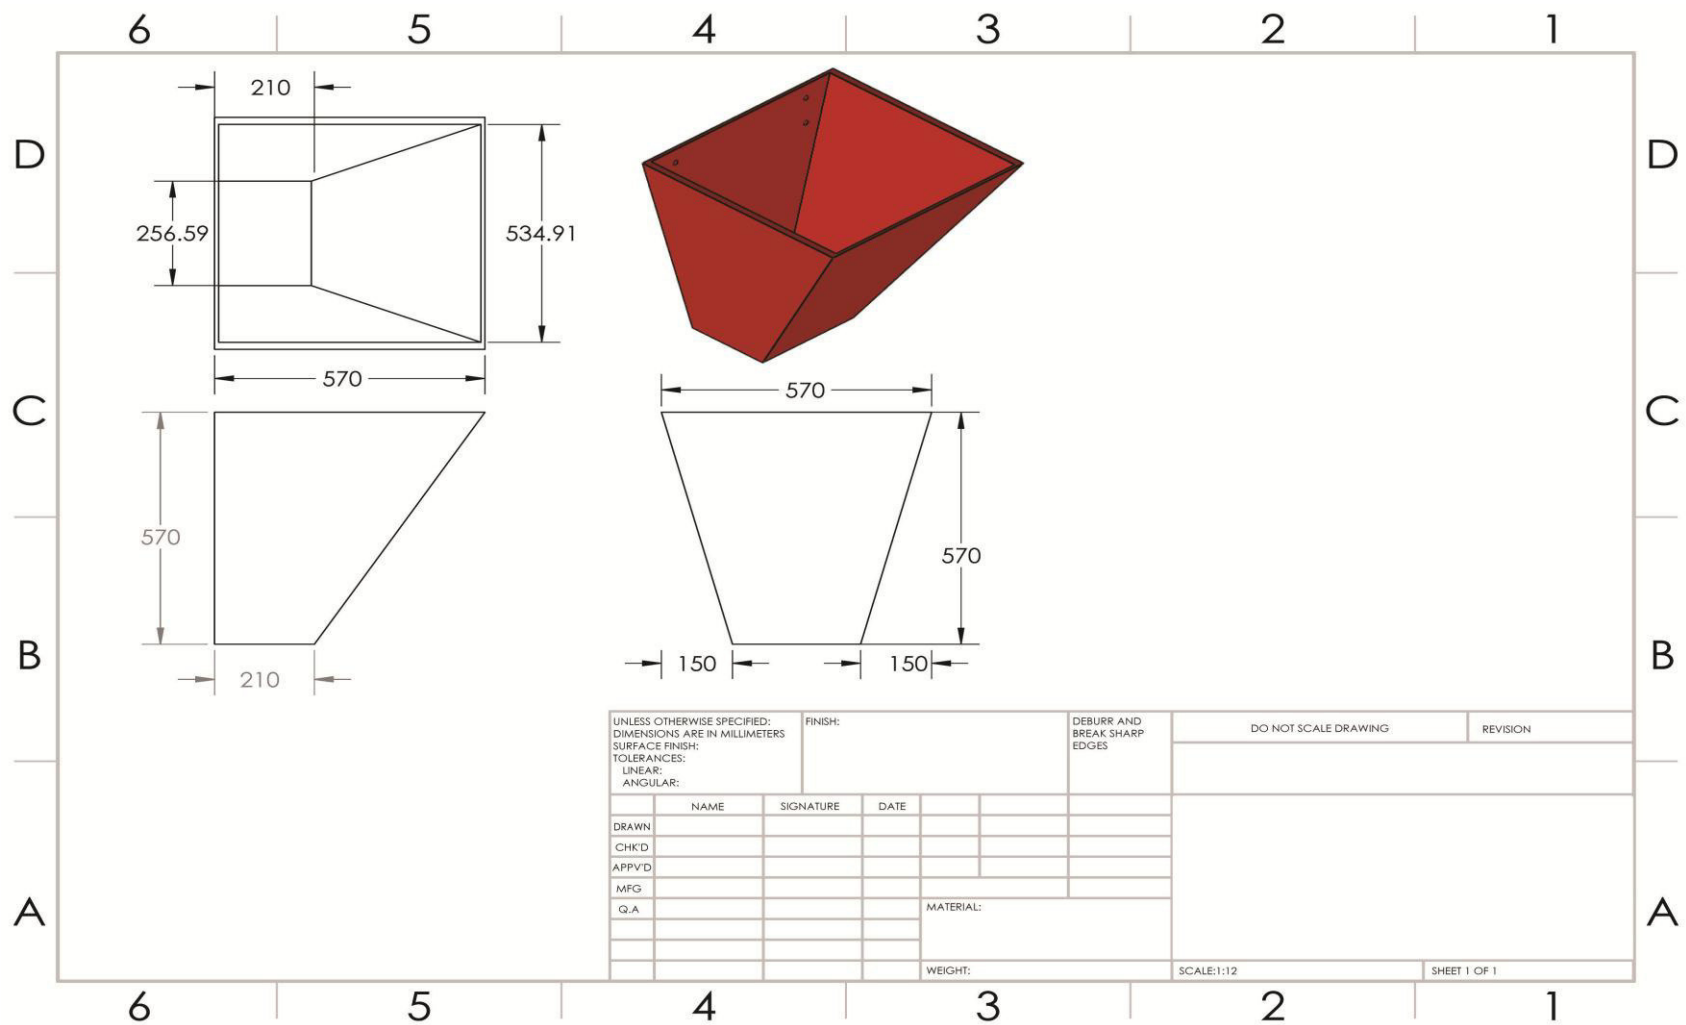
Engineering drawing of the hopper (Dimensions are in mm)
